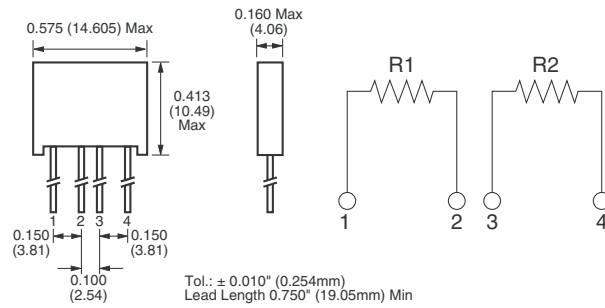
MOLDED 2R, 3R, 4R RESISTOR NETWORK DIMENSIONS AND CIRCUIT DESIGN in inches (millimeters)
